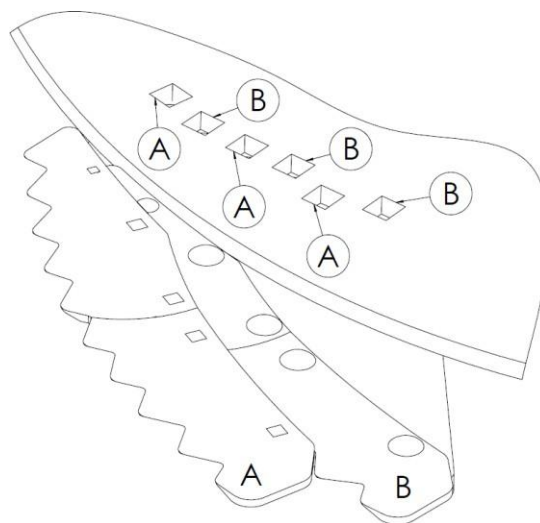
Changing the position of the cutting blades: A - cutting blades extended, B - cutting blades retracted
